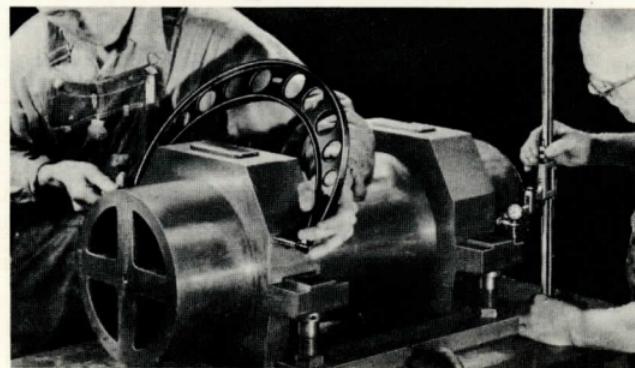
A variety of tools are used for linear measurements. The man at the left is checking a hard-to-reach dimension with a large Micrometer Caliper. The man at the right is using a Dial Test Indicator mounted on the jaw of a Vernier Caliper to compare the uniformity of height of several similar surfaces.
